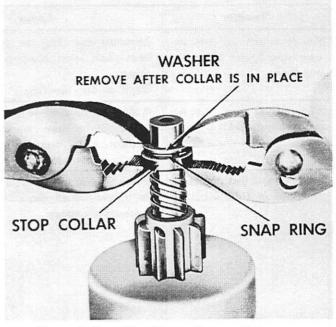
Installing Pinion Stop on Motor with Delco-Remy Inertia Type Drive
